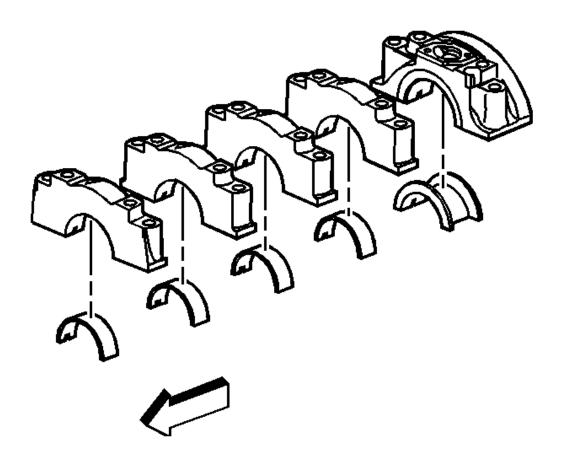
View Of Crankshaft Upper Bearings Courtesy of GENERAL MOTORS CORP.
